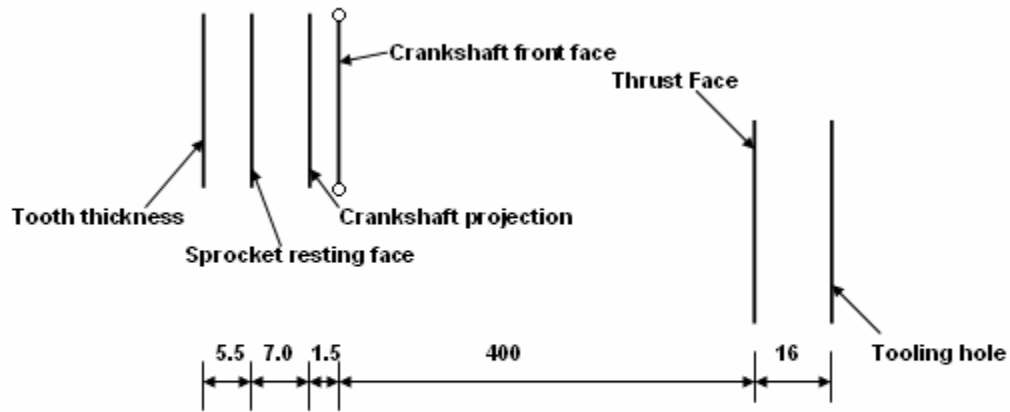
Planes For Crankshaft Sprocket Stack up Analysis
